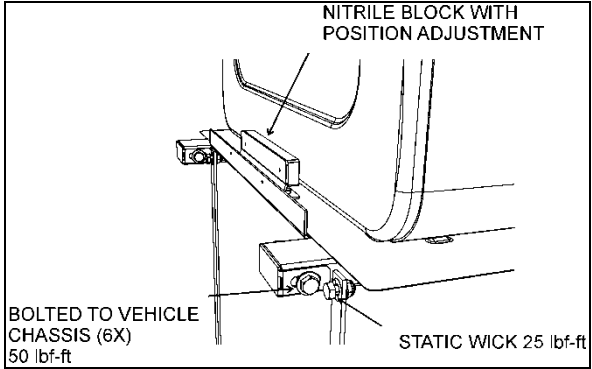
FUEL TANK SUPPORT MOUNTING BOLTS
